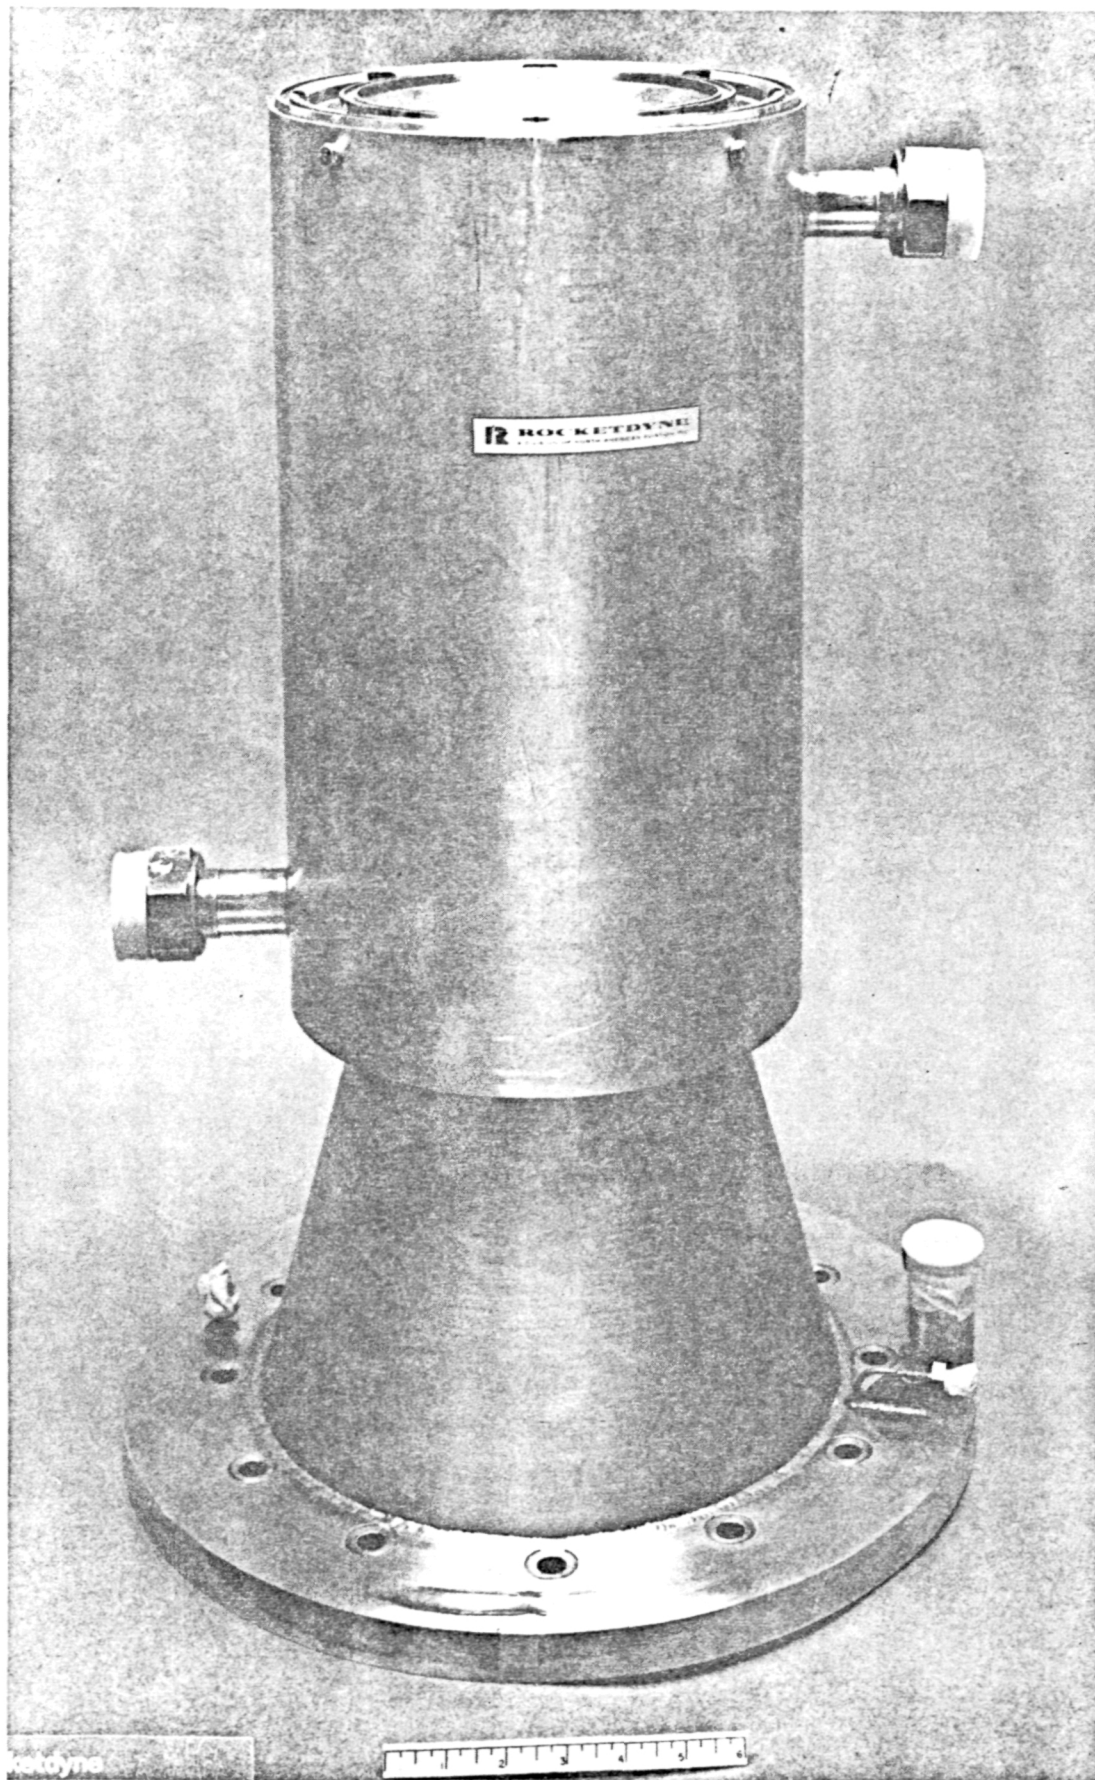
Final Assembly of No. 1 Thrust Chamber with Auxiliary Water Cooling Jacket Installed
